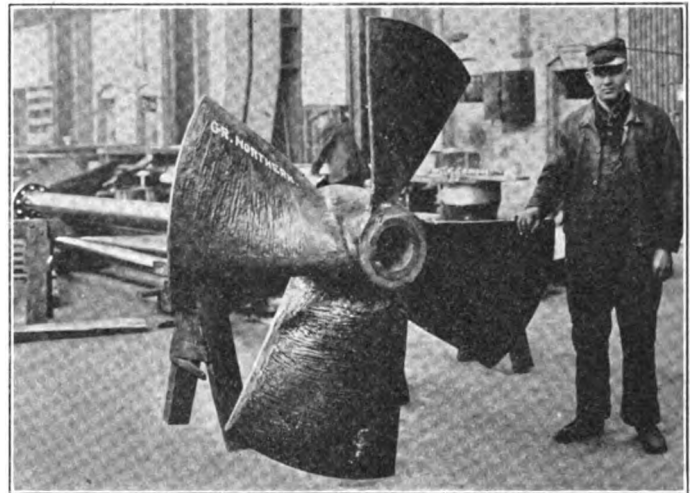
SHOP VIEW OF 72-IN. HIGH-SPEED CAST STEEL RUNNER
